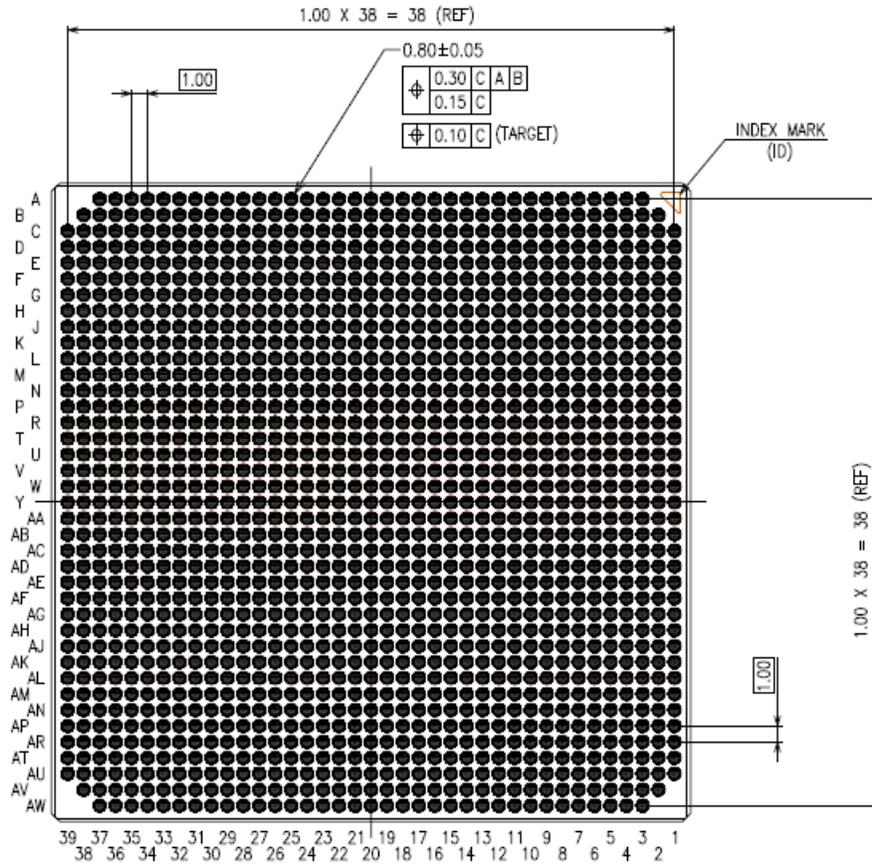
RTPF500T-CB1509 Package Bottom-View
